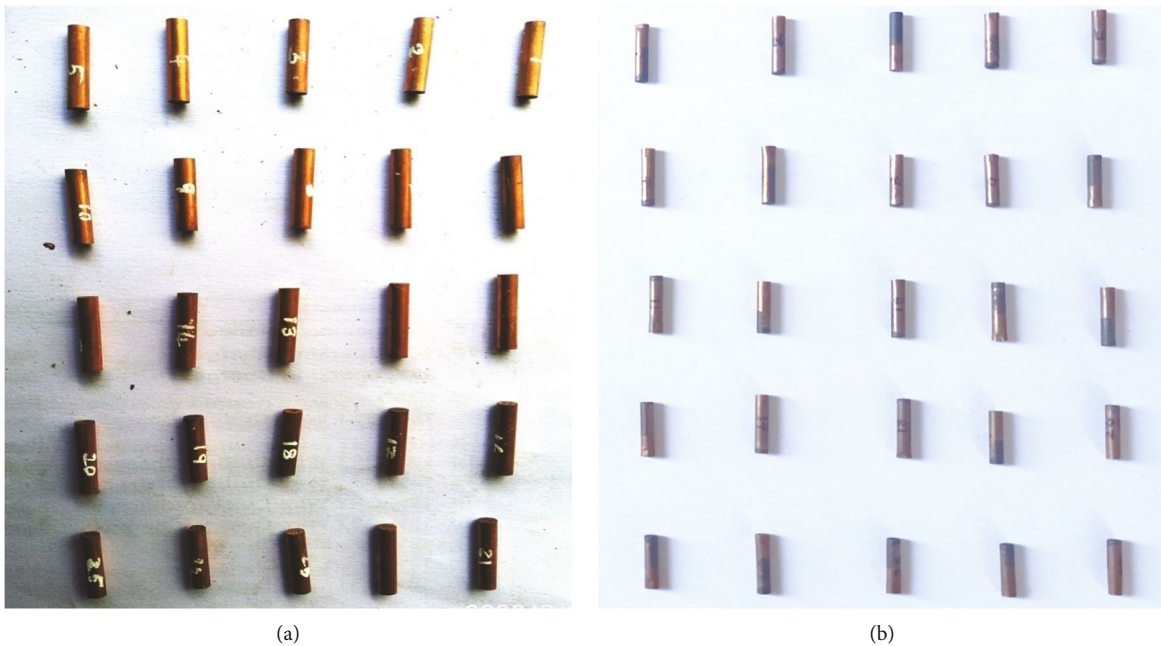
Cylindrical shaped electrodes: (a) before machining; (b) after machining.
